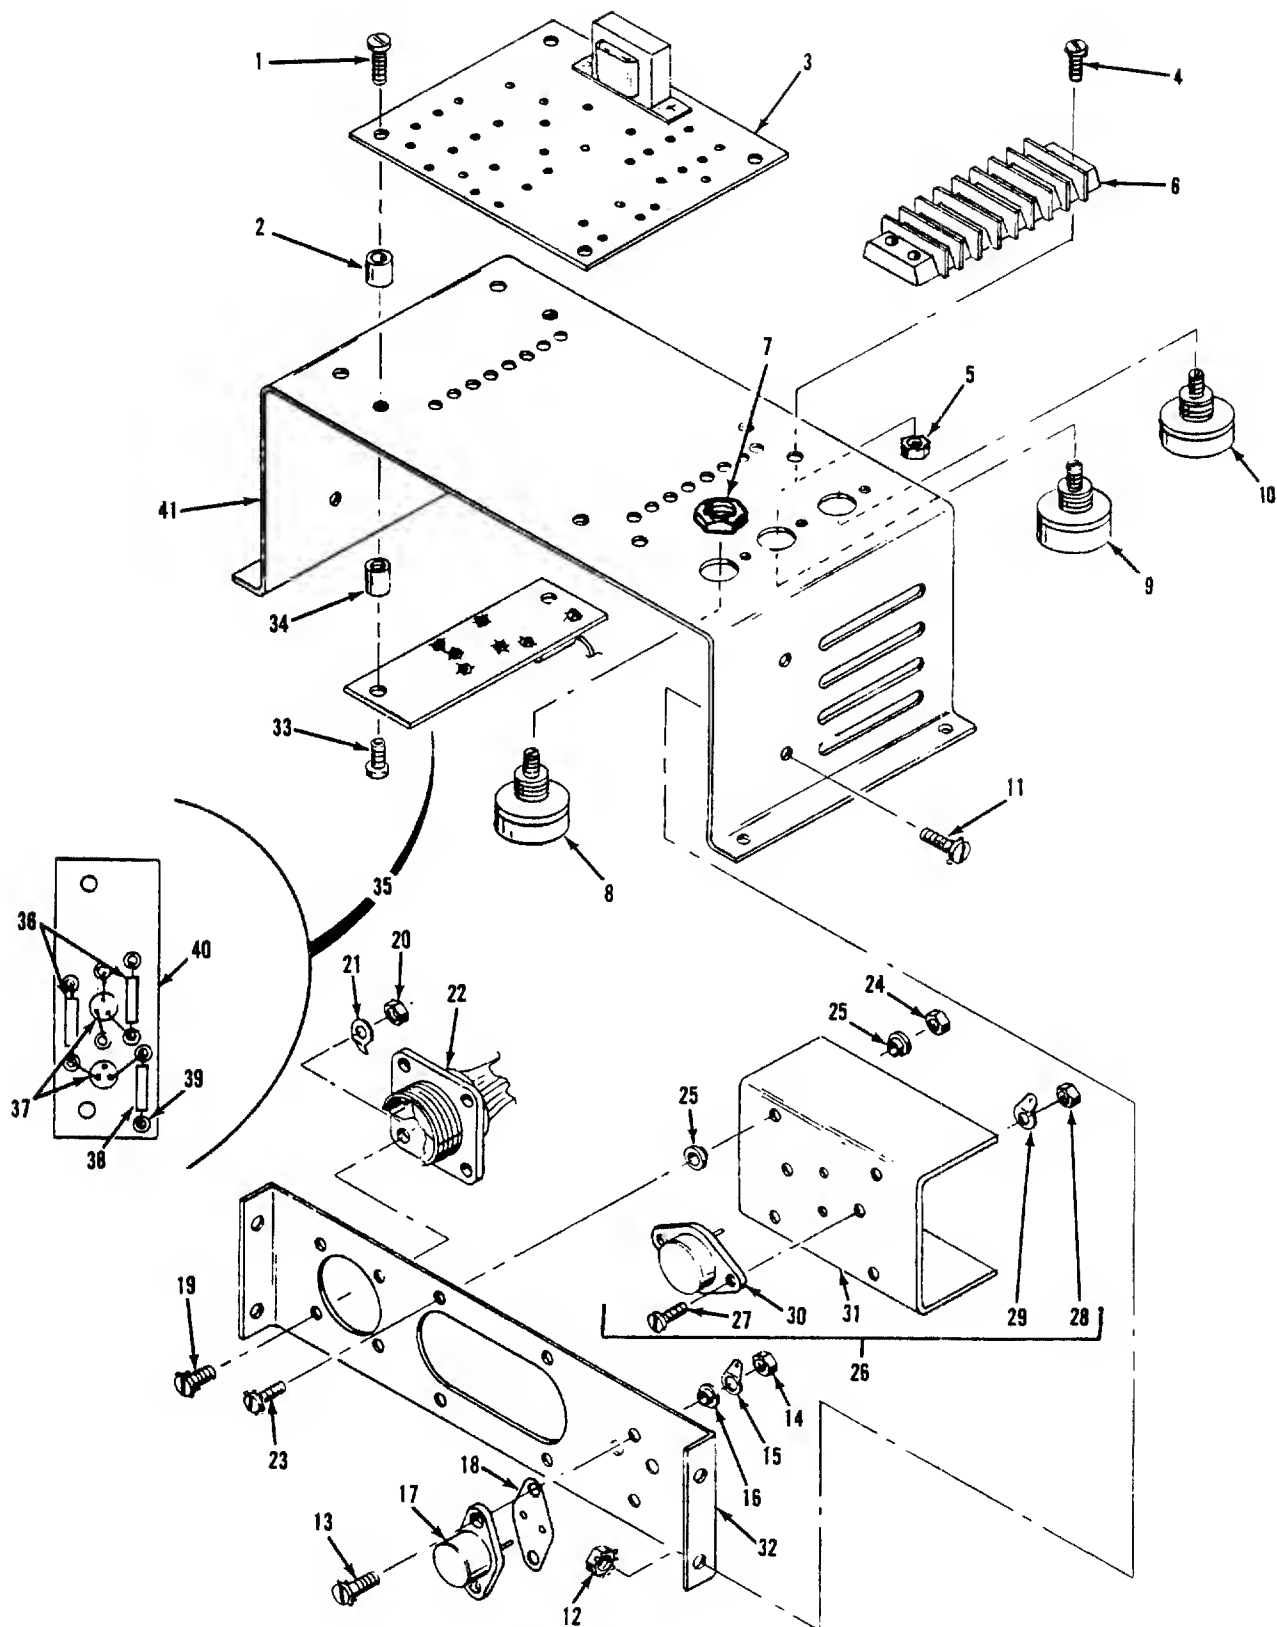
Voltage Regulator, Exploded View (Sheet 1 of 2)
